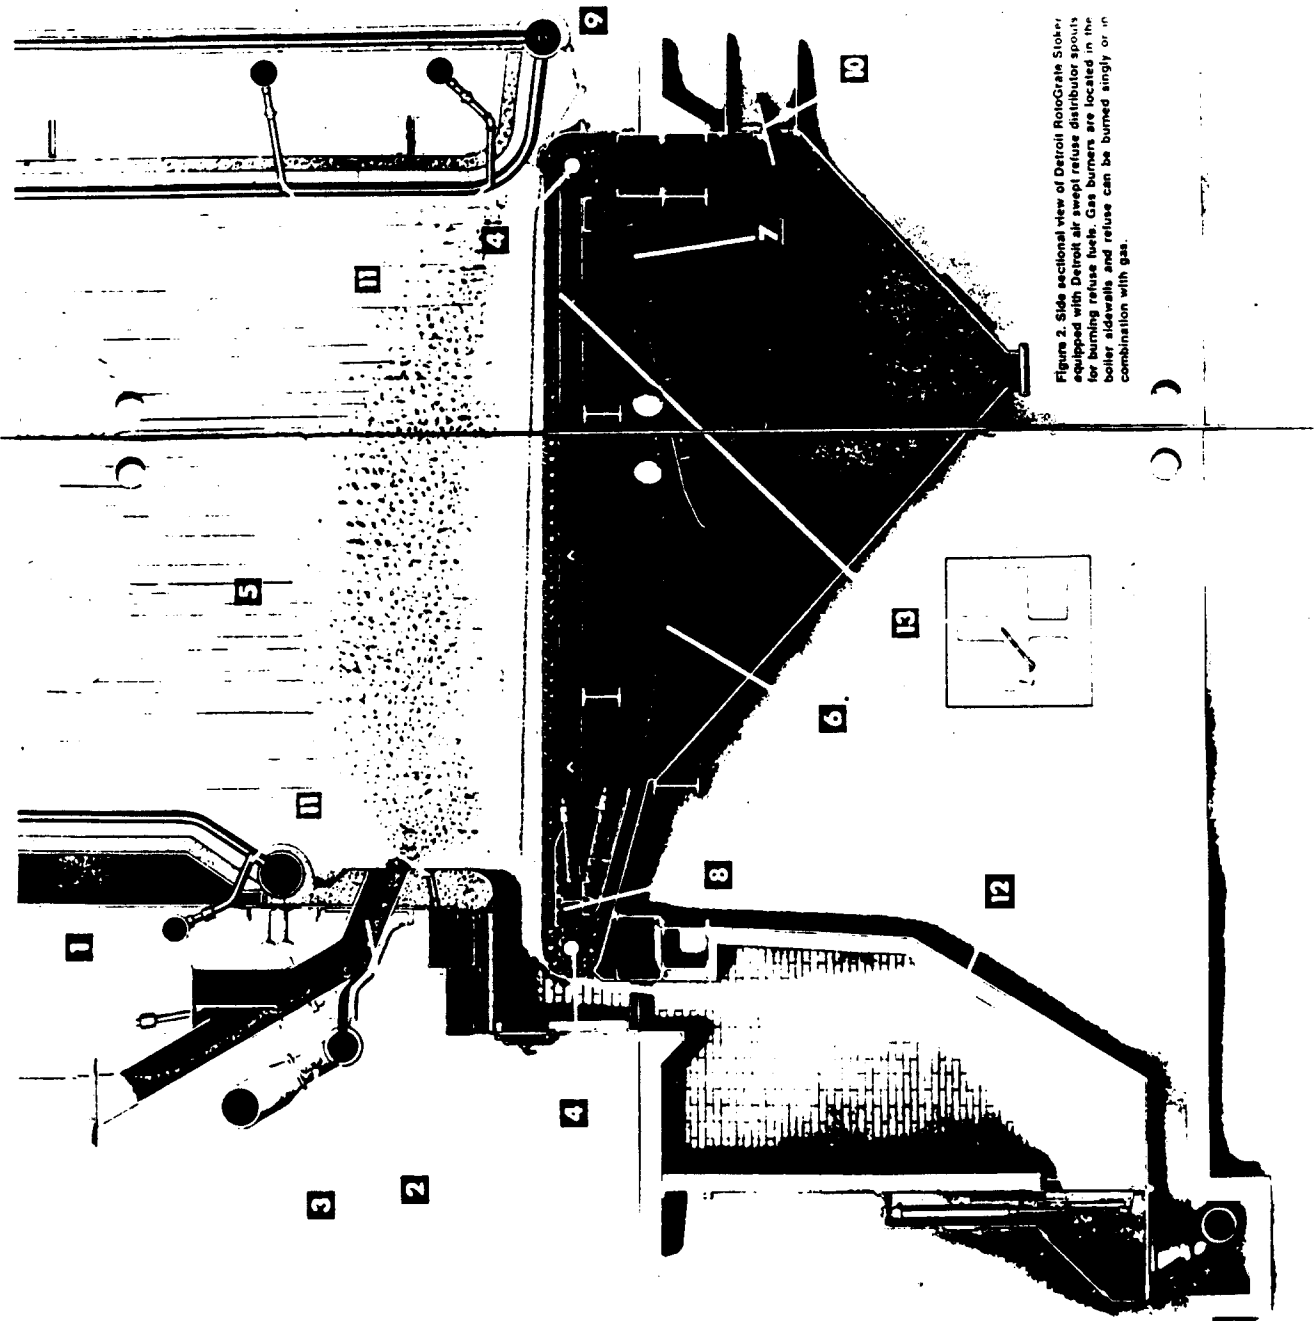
Side sectional view of Detroit RotoGate Stoker, equipped with Detroit Air Sweep refuse distributor spouts for burning refuse fuels. Gas burners are located in the boiler sidewall and refuse can be burned singly or in combination with gas.
